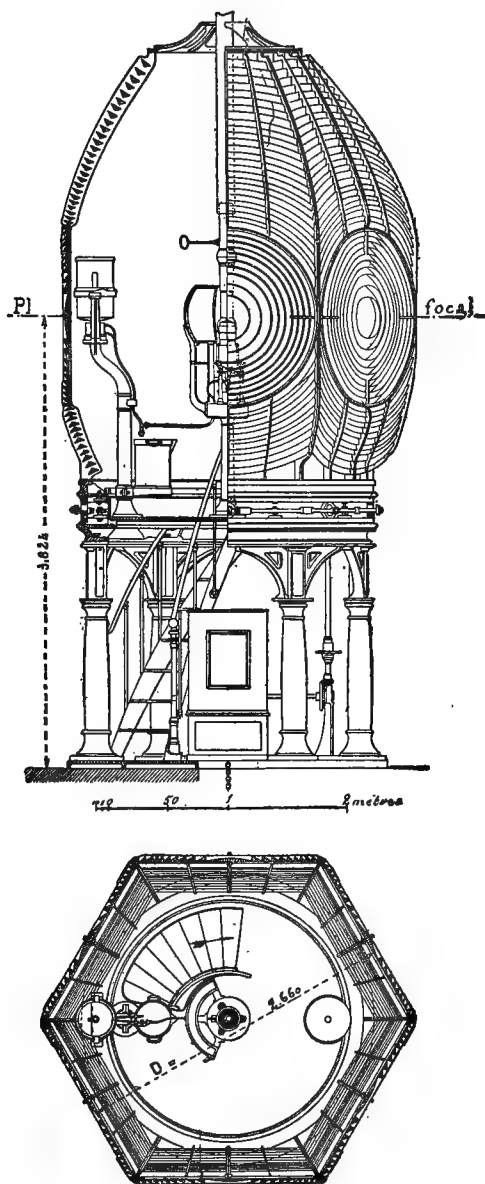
Half elevation, half section, and plan of the hyper-radiant apparatus for the new lighthouse at Cape Antifer, near Havre.
